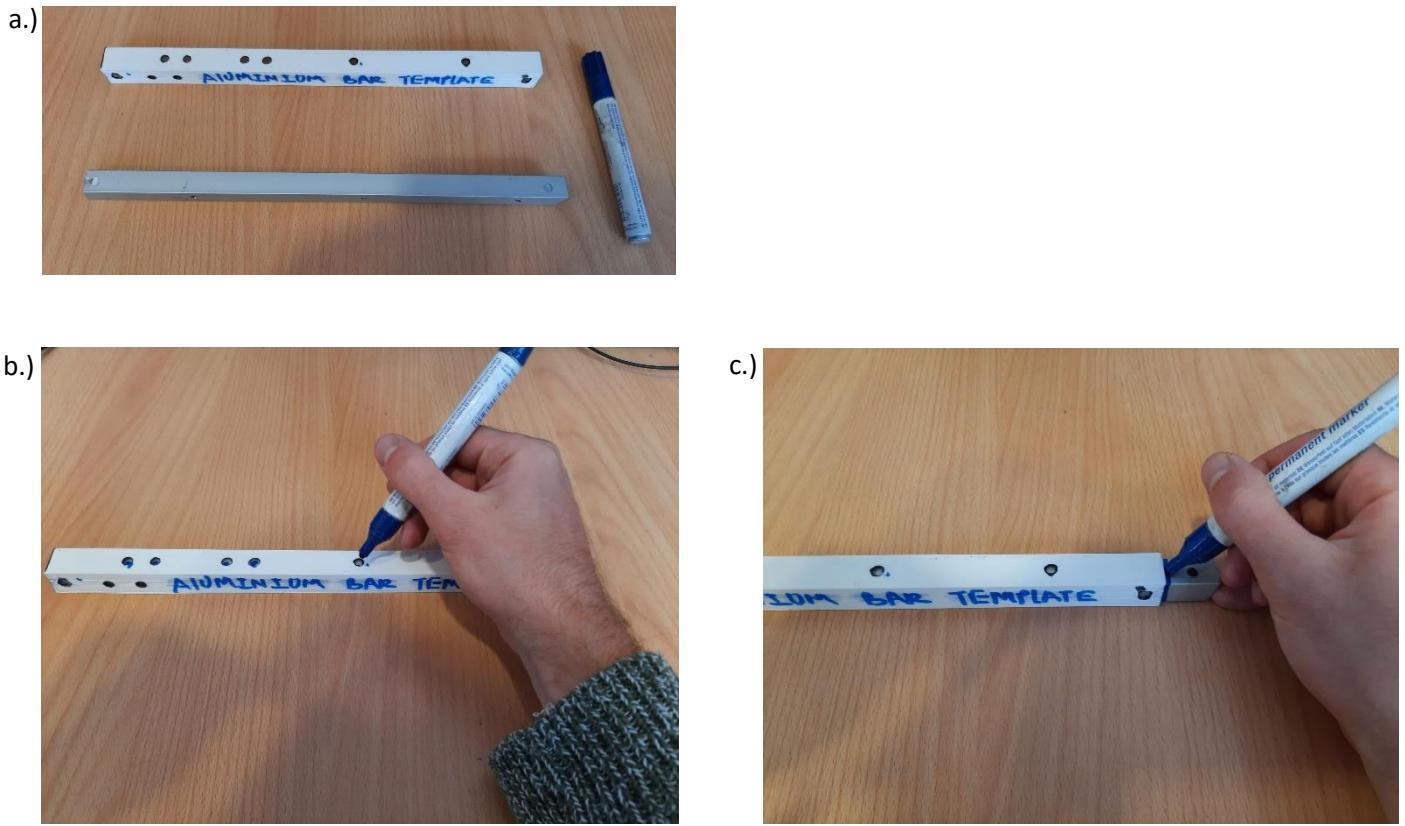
Photographic guide images detailing the construction of part 51 the chamber brackets.
